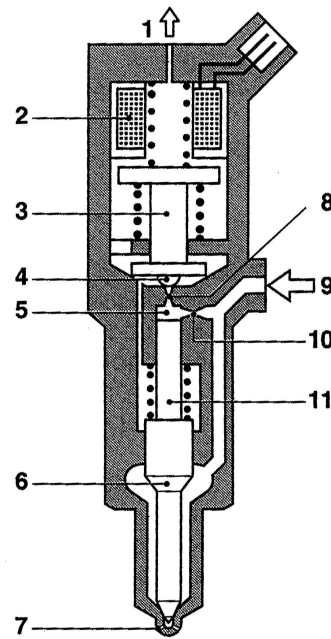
Servo-hydraulic solenoid valve fuel injector: 1 Fuel return, 2 Solenoid coil, 3 Solenoid armature, 4 Valve ball, 5 Valve control chamber, 6 Nozzle-needle pressure shoulder, 7 Injector nozzle holes, 8 Outlet restrictor, 9 High pressure port, 10 Inlet restrictor, 11 Valve Plunger (BOSCH, 2004)
